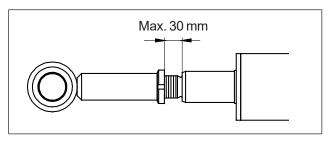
After finishing the adjustment, make sure the distance between the adjusting collar and the end of the thread is no more than 30 mm.
